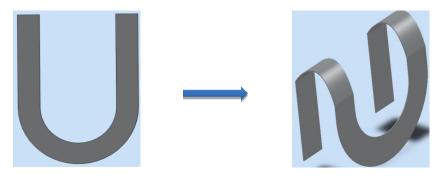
U shape piece of metal (left) and U shape metal after bending (right).
